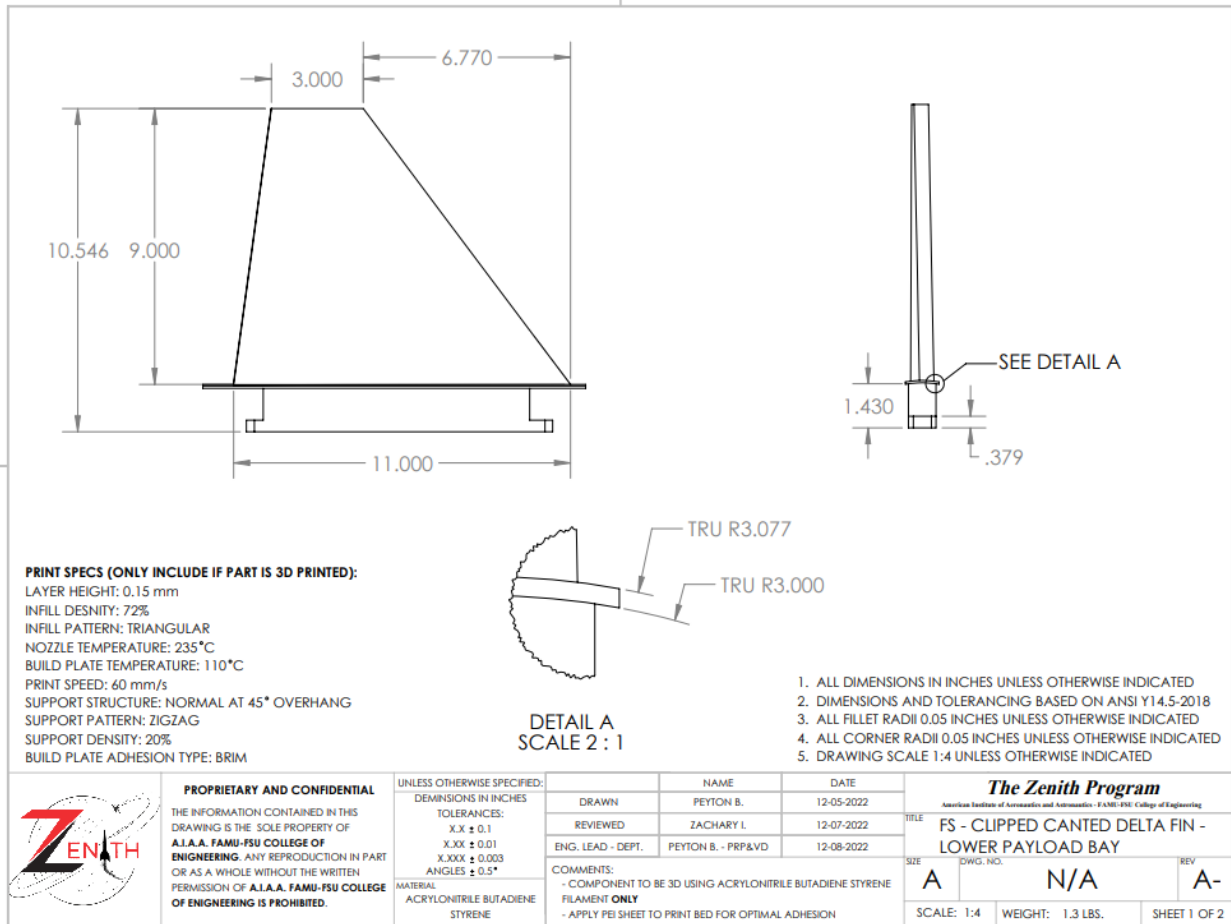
Canted Clipped Delta Fin CAD Drawing Sheet 1 of 2
